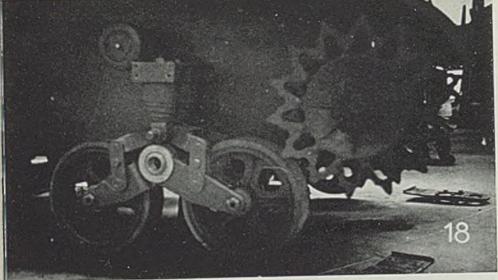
Here is the same bogie unit mounted on the tank. Also the sprocket wheels are shown mounted on the final drive units at the extreme front, or right
